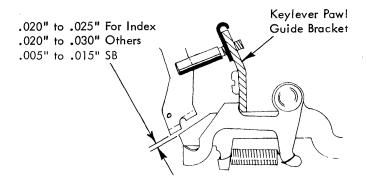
Keylever Pawl To Interposer Clearance Adjustment
